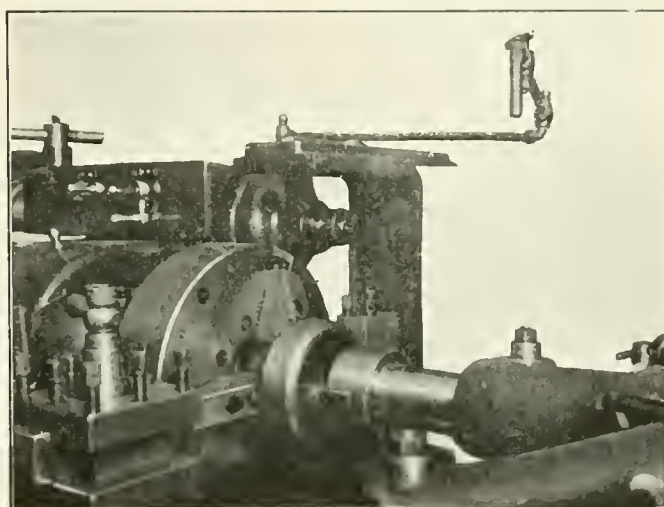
Outline of Tool Set Up on Combination Turret Lathe
